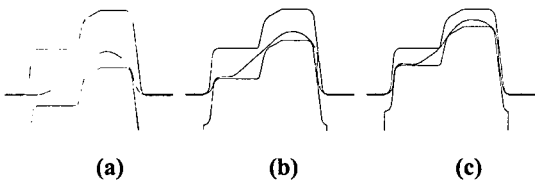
Cross section of the blank and the tools at the punch stroke of (a) 55.5 mm; (b) 73.5 mm; (c) 81 mm
